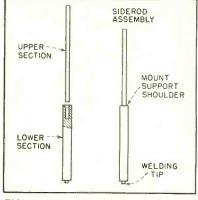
Siderod assembly, showing upper and lower sections and welding tip
